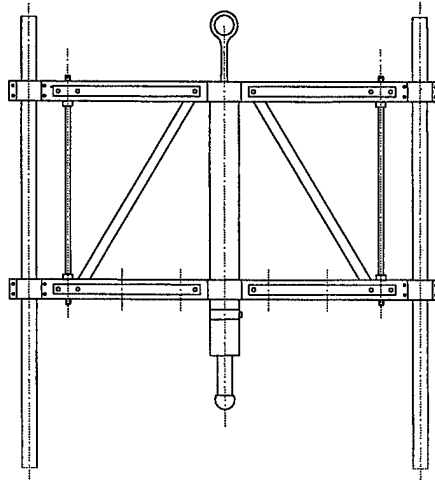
LOW WEIGHT IMPACTOR ASSEMBLY
